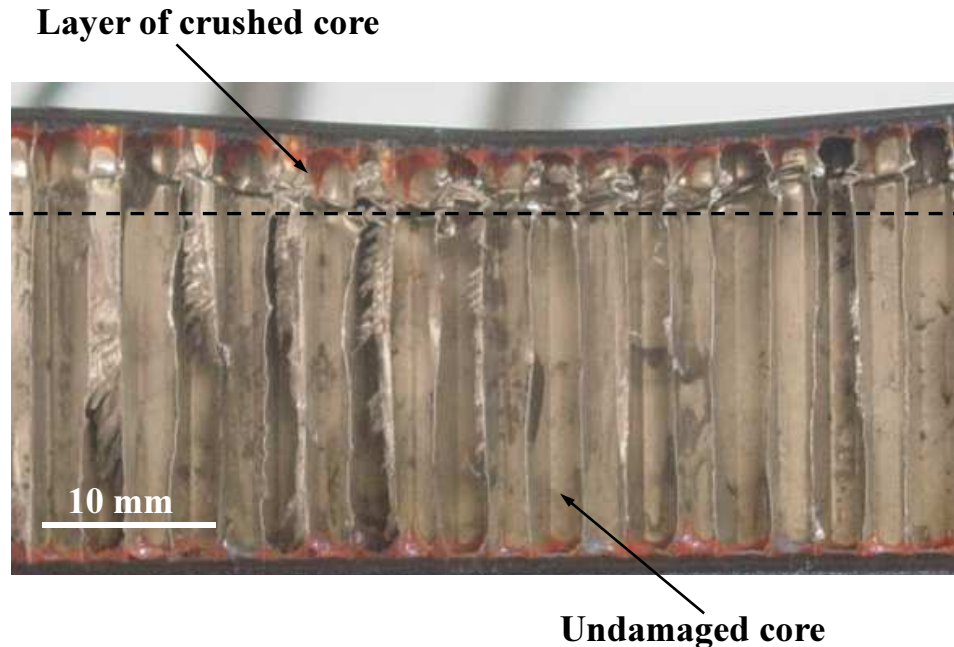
Cross-section of an indented Q1-C3 specimen.
